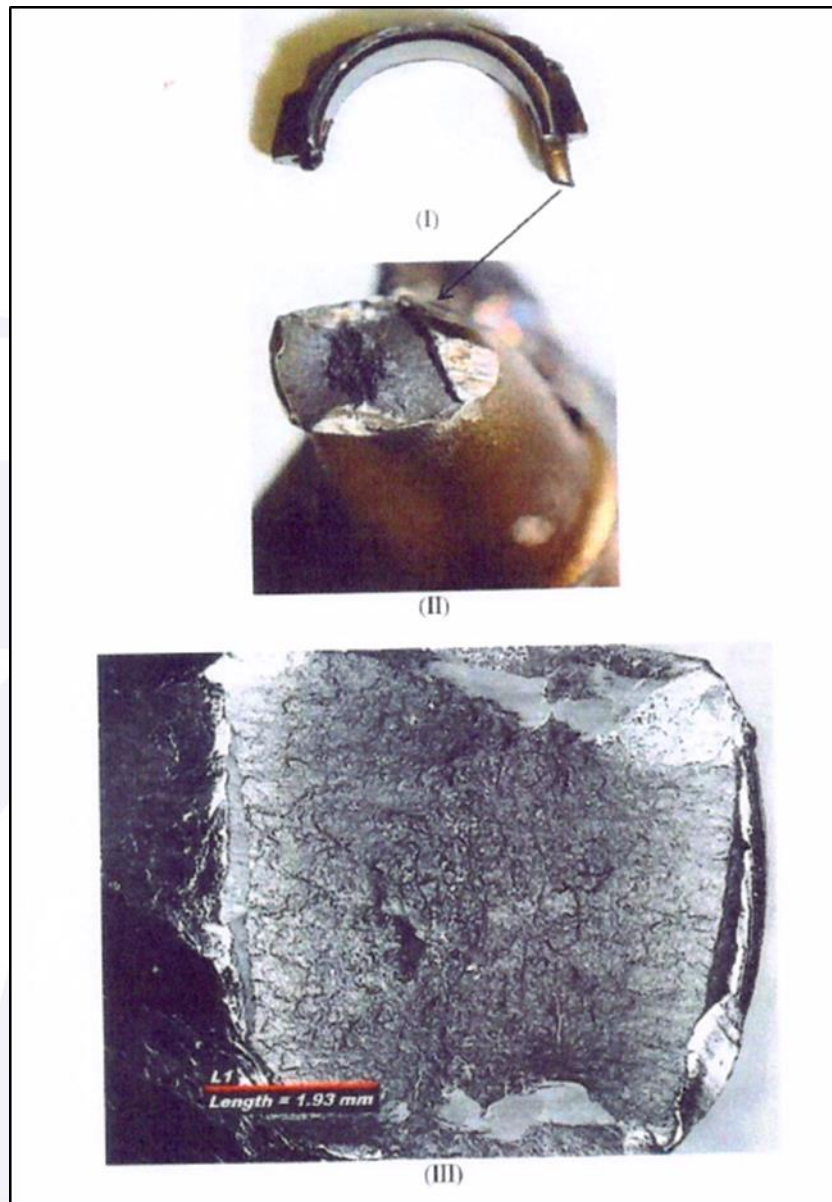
View of the fracture surface of the connecting rod cap-fastening bolt, with characteristics of tensile overload failure.
